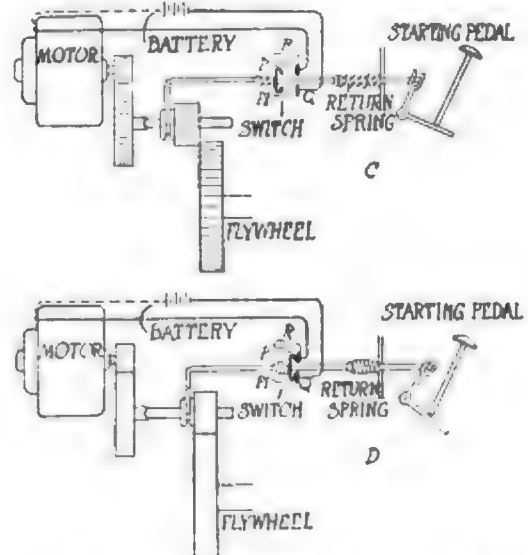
At C the teeth can be slid into full engagement, after which the motor connects directly with the storage battery and the engine is turned over, D
